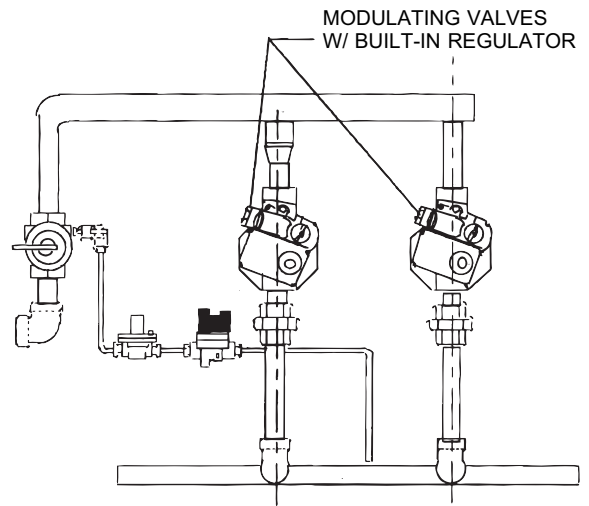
Mechanical Modulating Valve Location (sizes 0724-1336 shown)
